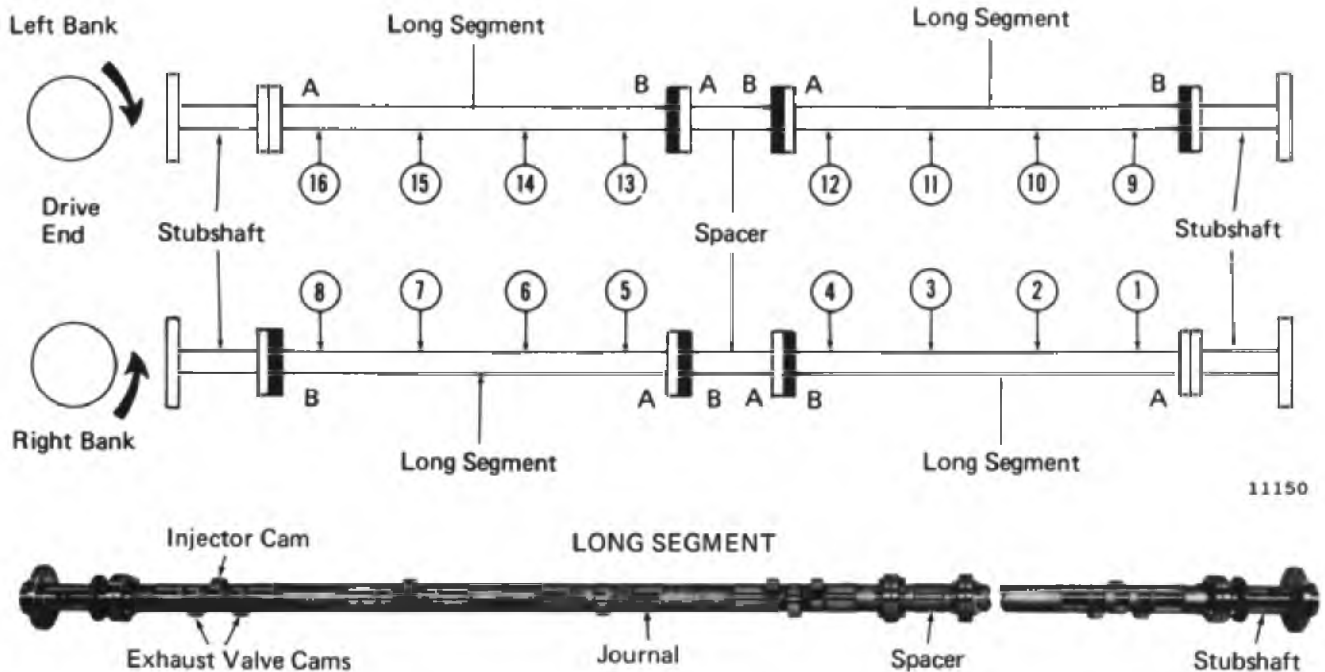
Camshaft Assembly (16-Cyl.)
